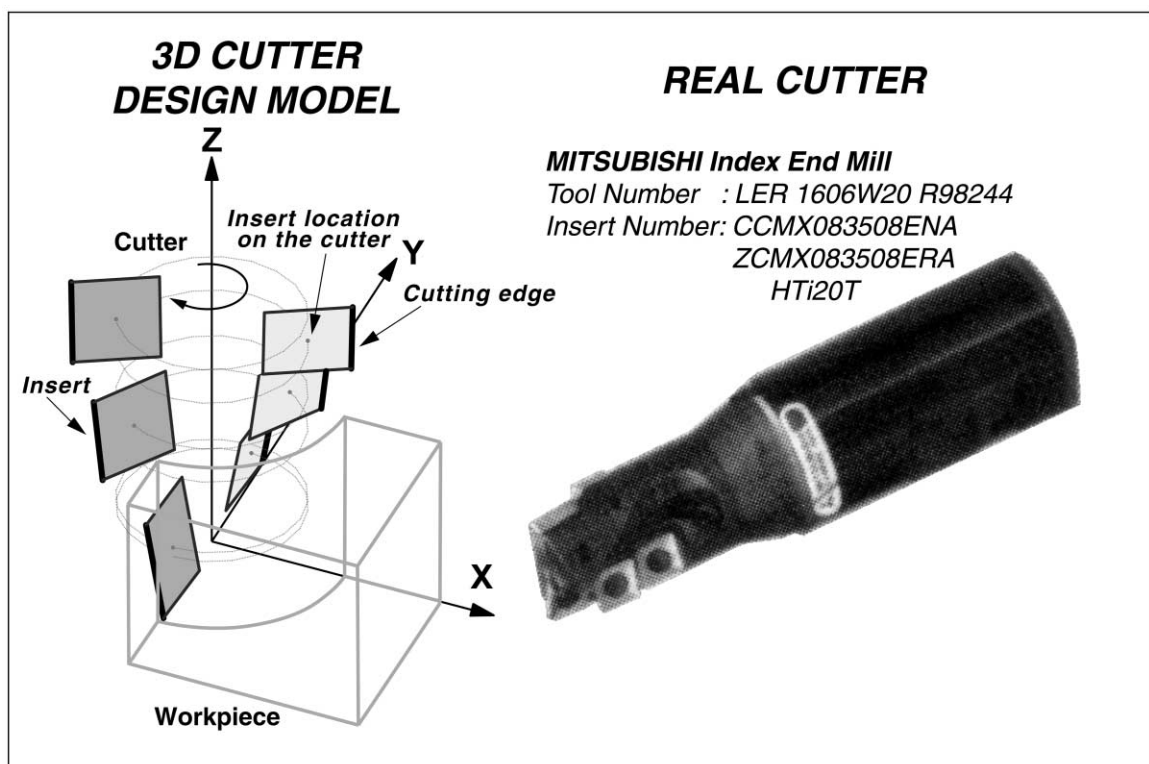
Mitsubishi inserted cutter Cutter II (cutter number: LER1606W20 R98244; insert numbers: CCMX083508ENA, “insert dimensions $a=8.0$ mm, $b=8.0$ mm” and ZCMX083508ERA, “insert dimensions $a=8.0$ mm, $b=10.0$ mm”, HTi20T). See Eq. (10) for insert location parameters. Shank diameter=31.75 mm, cutter diameter=25.4 mm, two flutes, three inserts on every flute.
